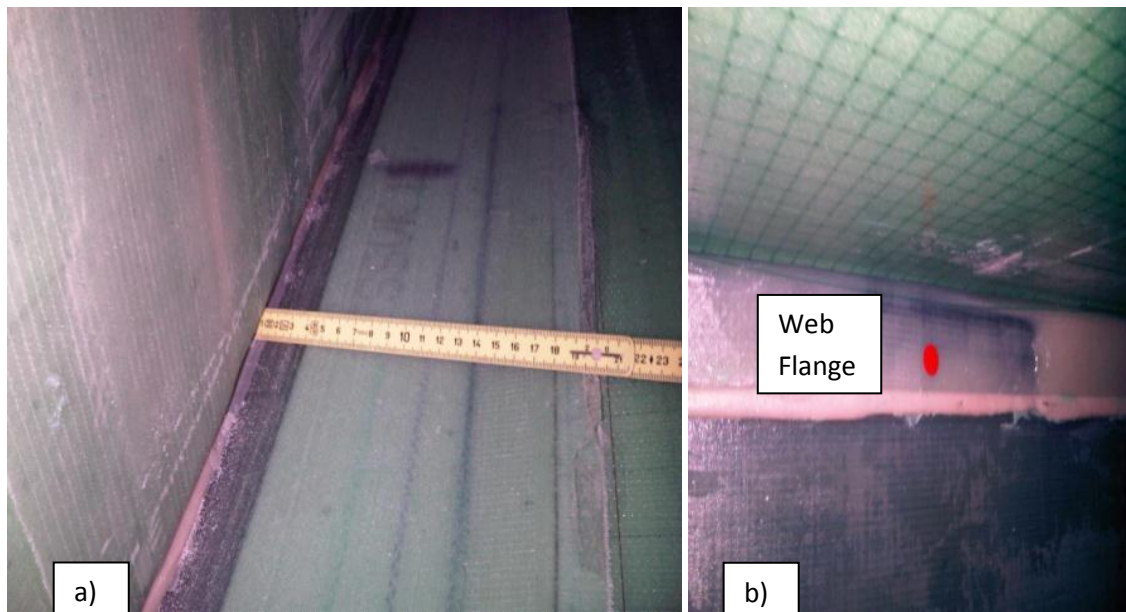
Most common defects in blades: a) run-out in the web, and b) lack of adhesive in the web.
